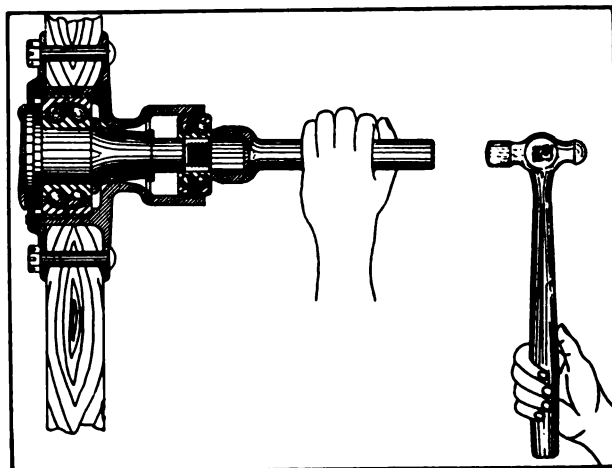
Showing How the Blows of a Hammer May Be Distributed Evenly with Tubular Tool.
